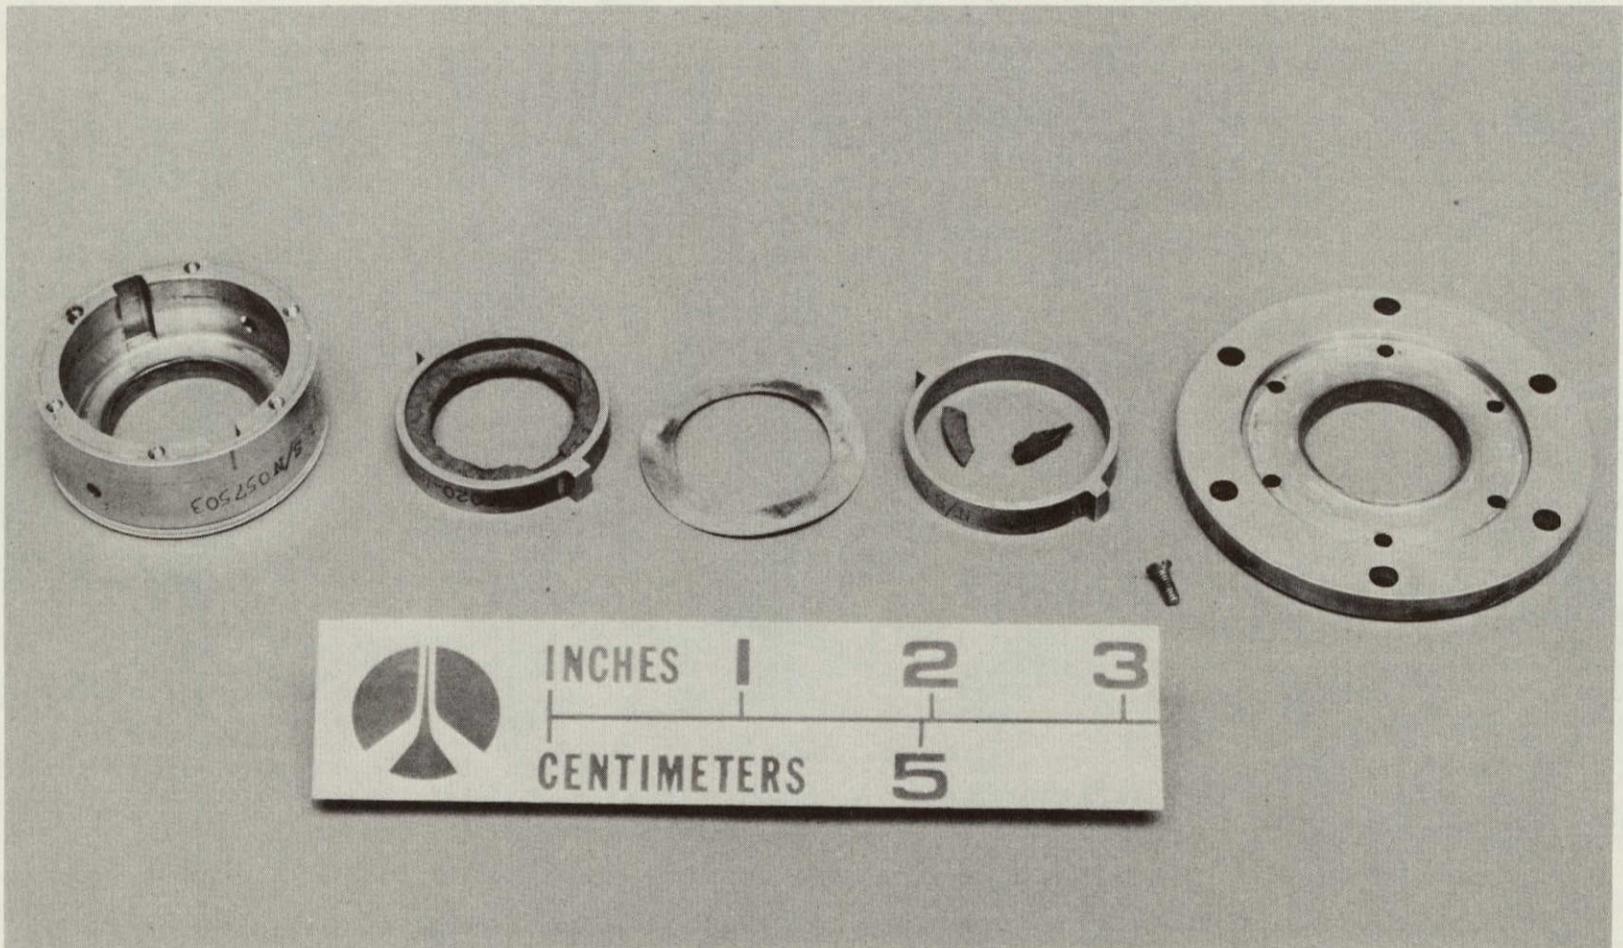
Helium Seal Assembly (Posttest 186 Spinup)
